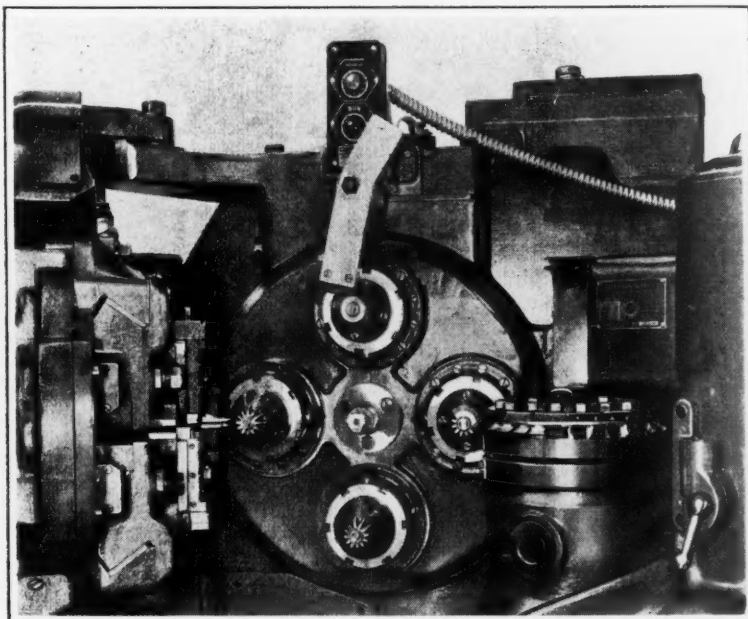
The Four-station Work Turret, Circular Formed-blade Roughing Cutter, and Reciprocating Finishing Tools
